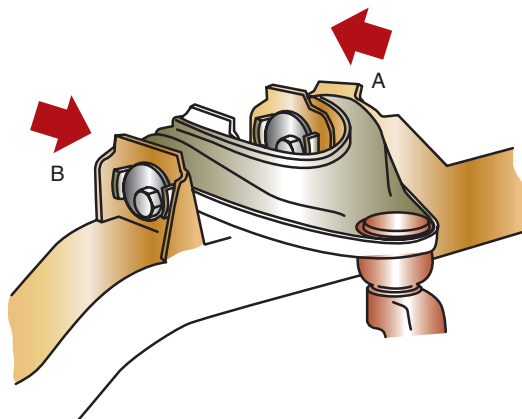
Eccentric cam installed behind upper control arm attaching nut.
